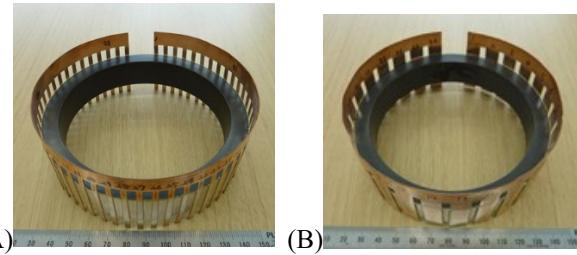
Test pieces which brazed an AlN cylinder and thin copper strips. The width of a copper strip is 3 mm for test piece (A) and 10 mm for test piece (B).
